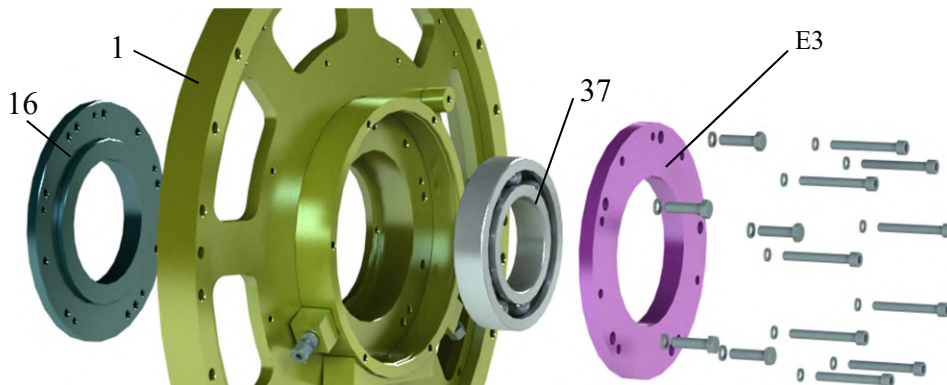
Dismantling of Parts from the Bearing Shield (Drive Side)
